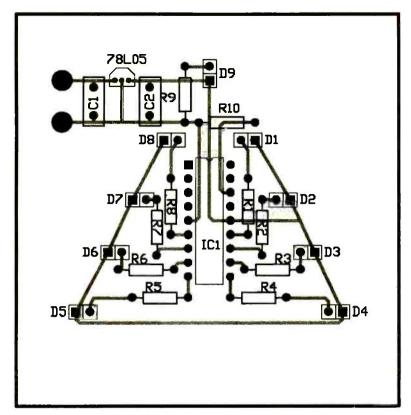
Shown above is the placement for the components on the printed circuit board.
